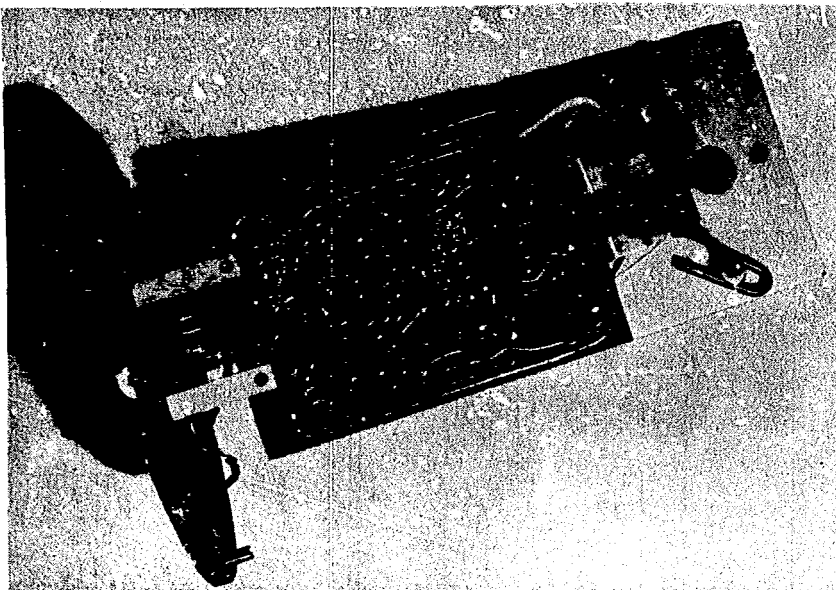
HP-212 DETECTOR, P.C. BOARD FOIL SIDE
